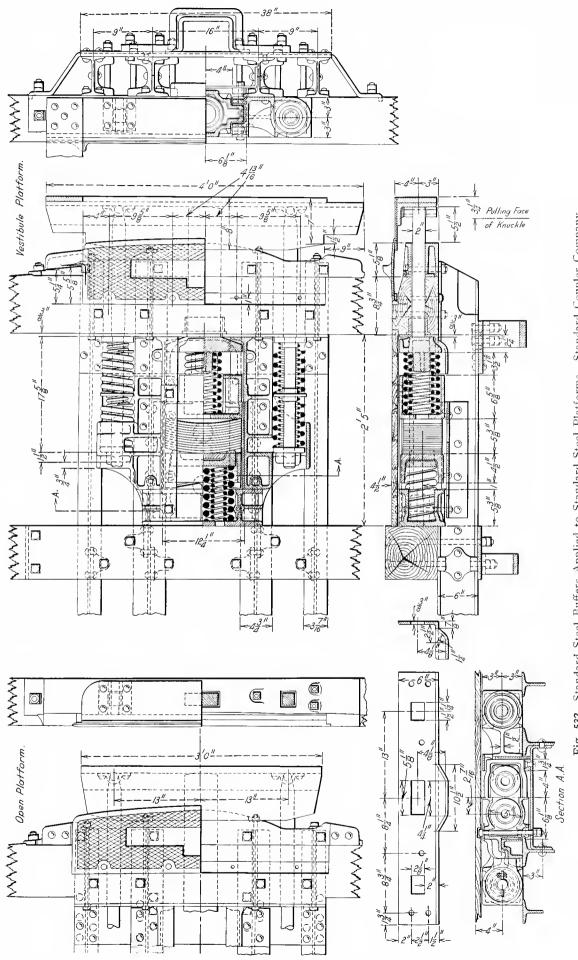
Standard Steel Buffers Applied to Standard Steel Platforms. Standard Coupler Company.
